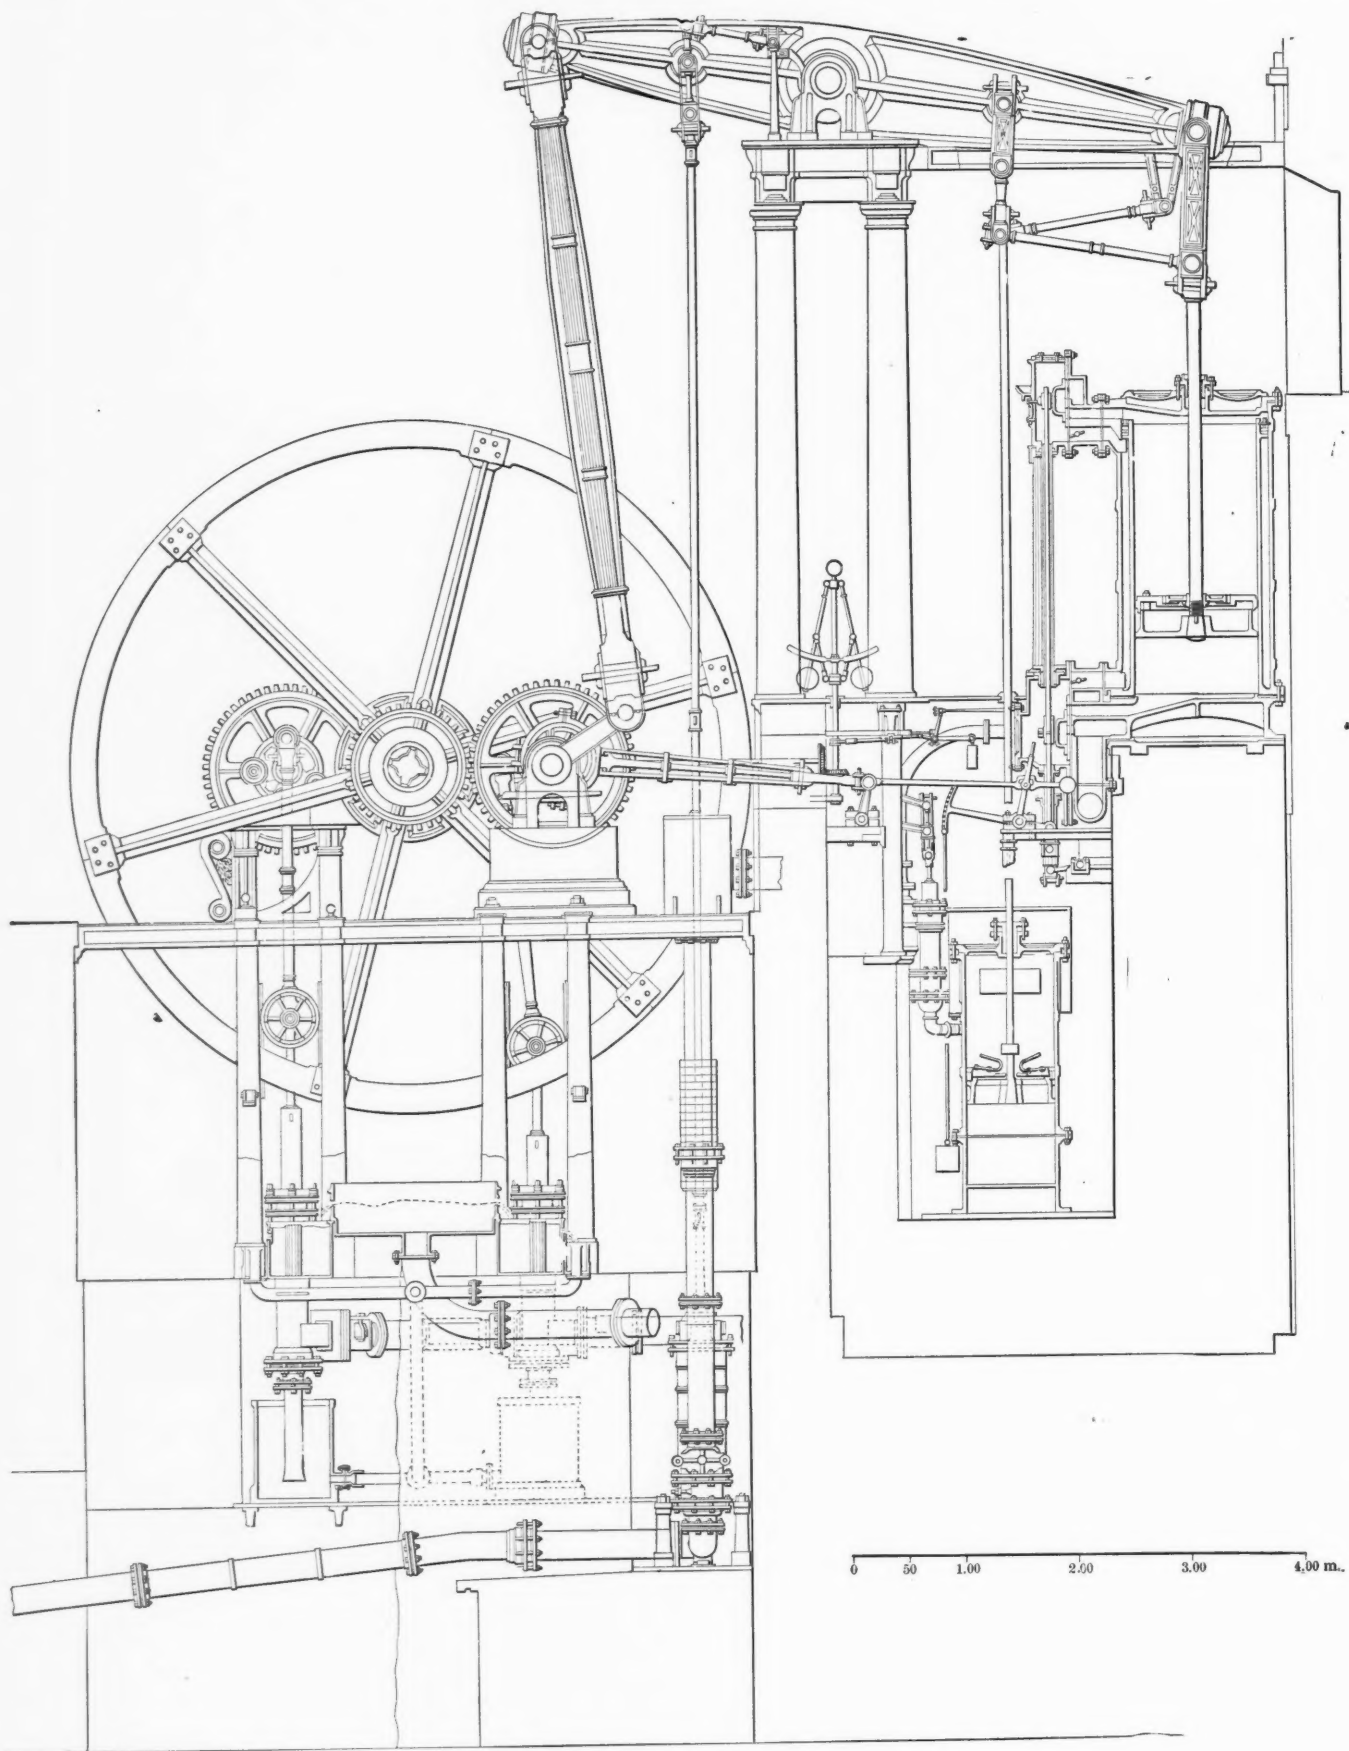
Elevation of the Versailles Water Works Engine at Marley.
